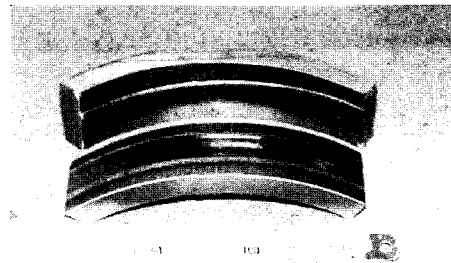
Keyhole TIG welding of titanium pipe
